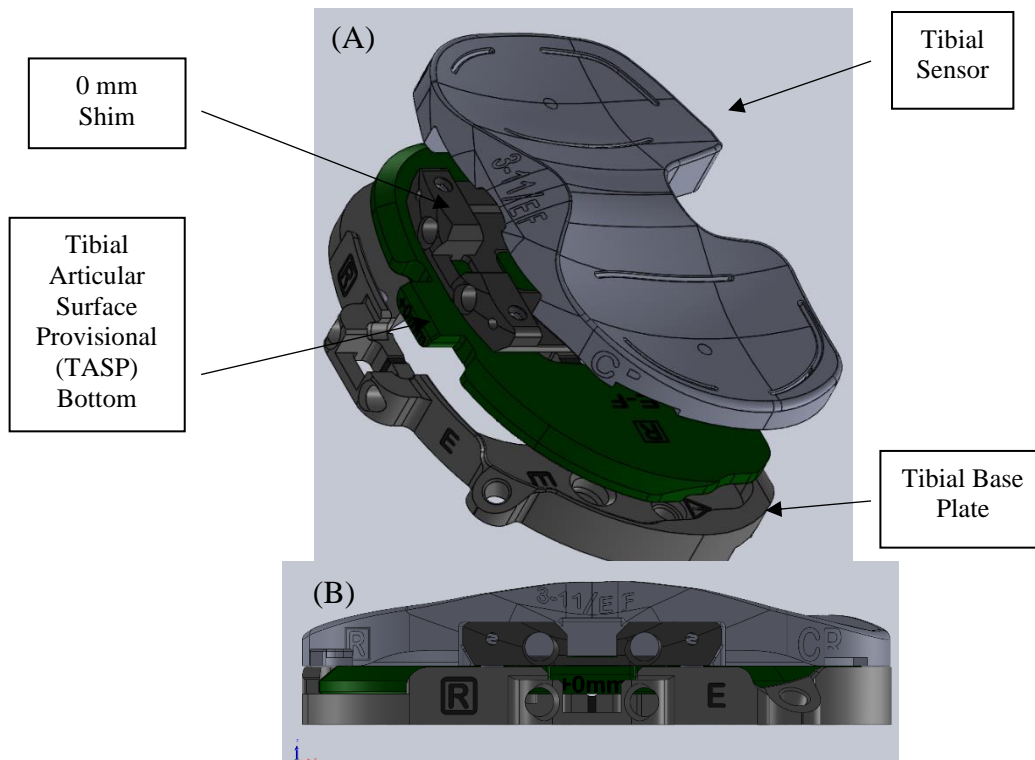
Zimmer Specific Sensor Configuration with PKS a) Exploded View b) Front View
